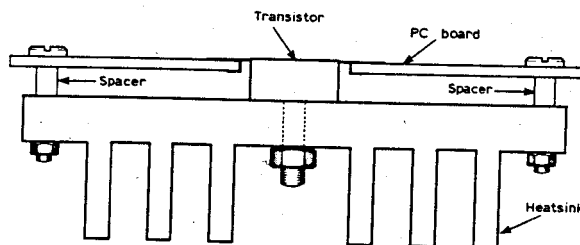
Mounting arrangements for pcb, transistor and heat sink
